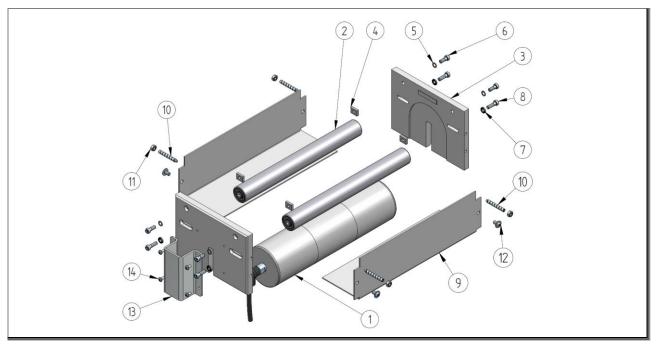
Parts list: Central motor drum motor - drive unit/motor unit - position of drive unit 56 - ZZ.900.0186
